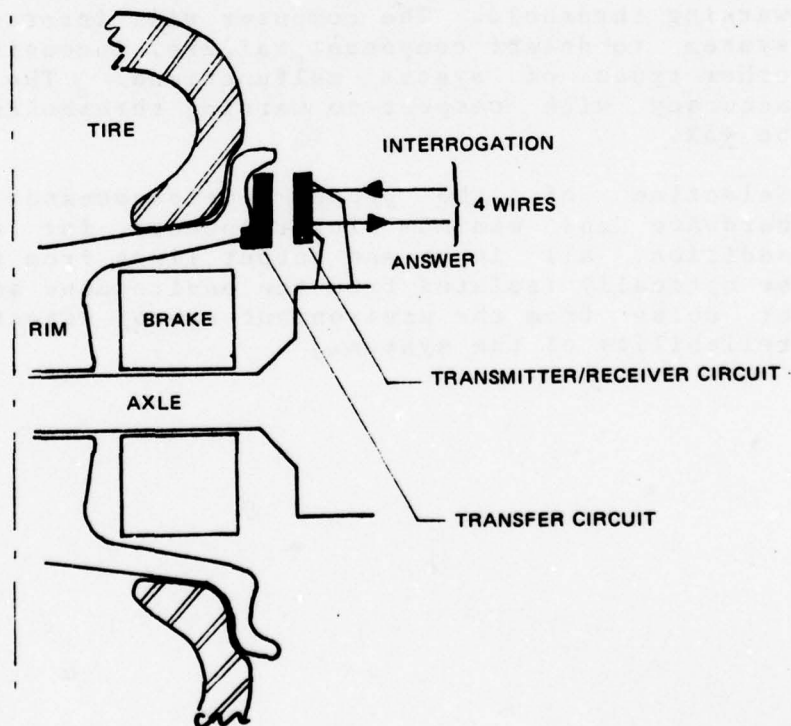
WHEEL MOUNTING CONFIGURATION (CONCEPT H)
